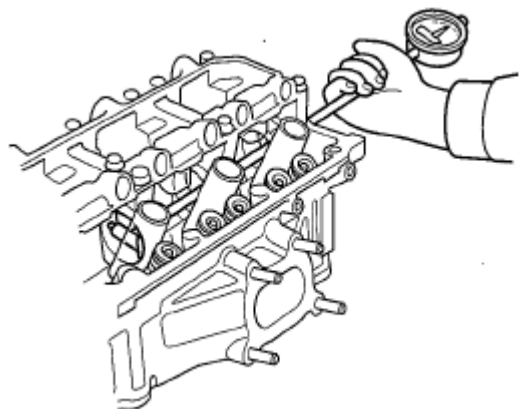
Measuring Camshaft-To-Holder Oil Clearance
